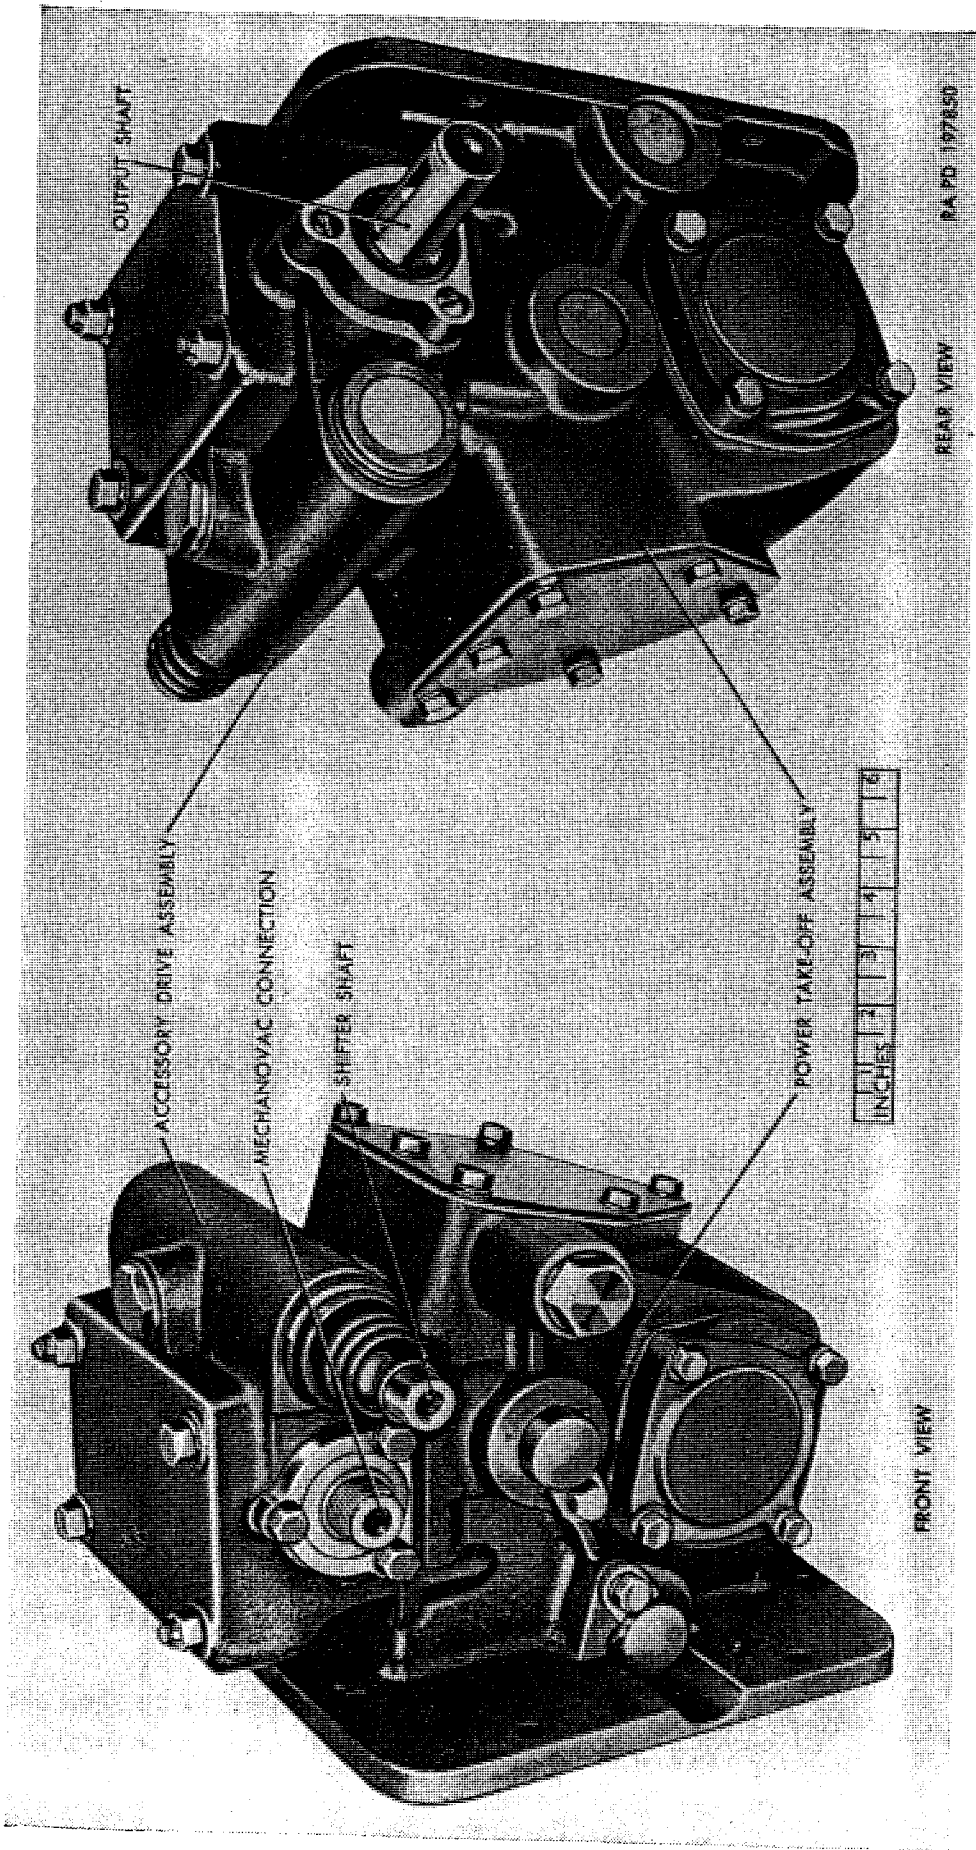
Front and rear views of tank body pump power-take-off and accessory drive assemblies.
